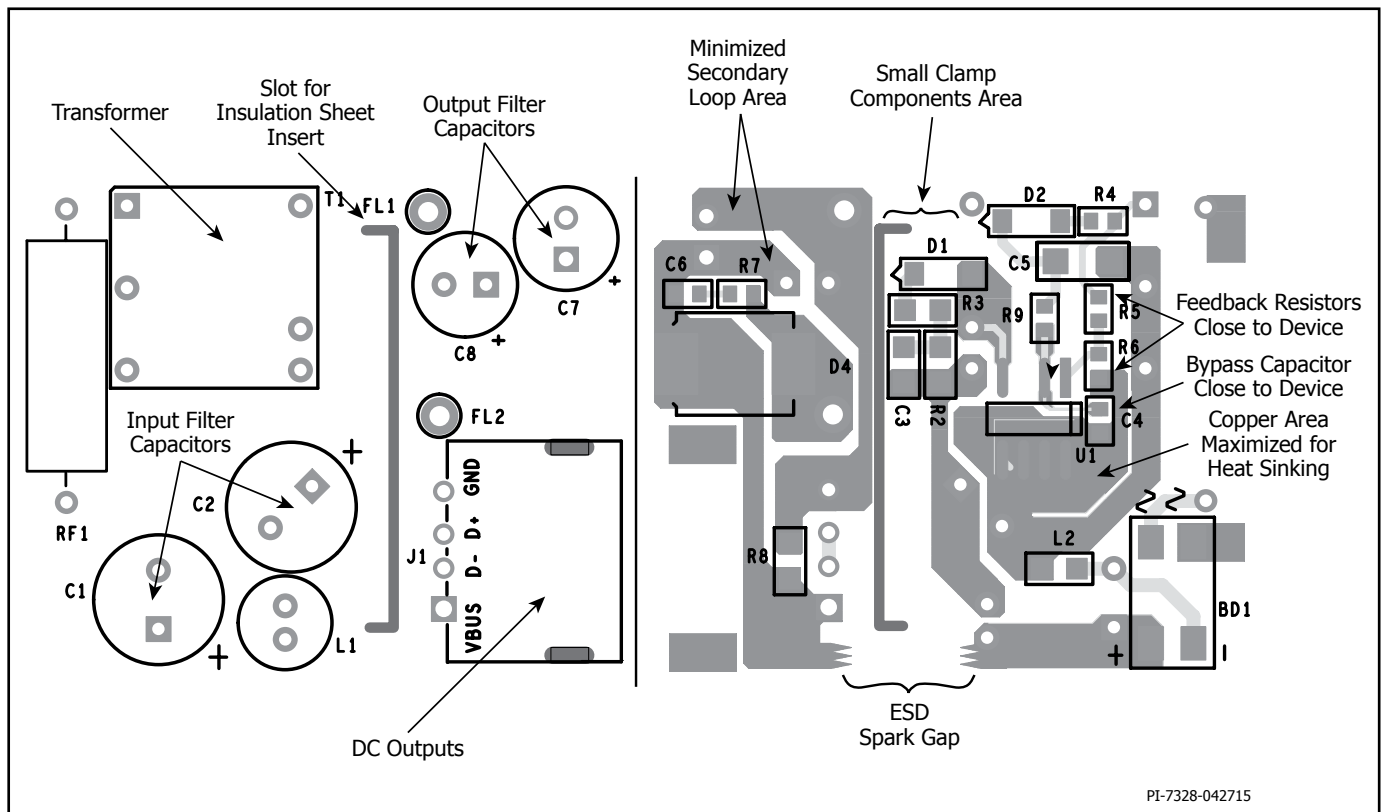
PCB (Top Left) (Bottom Right) Layout Example Showing 10 W Design using P Package.
